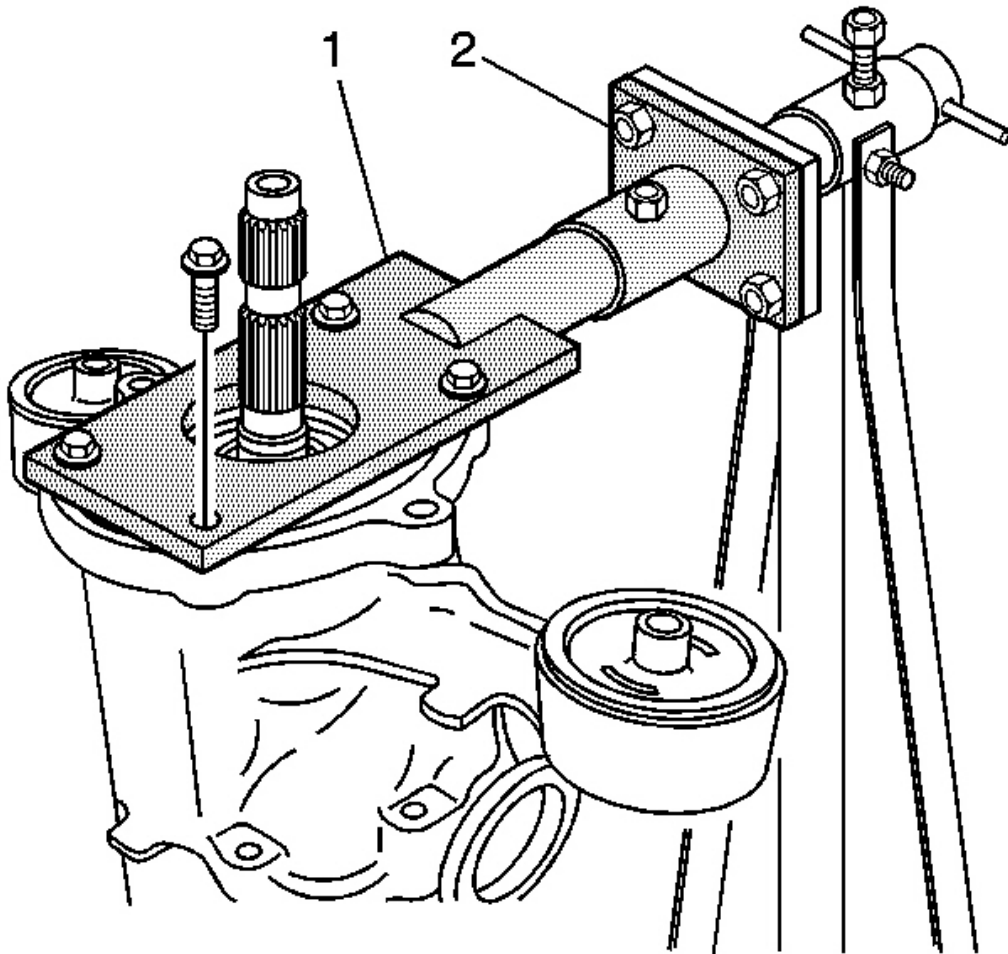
Installing Differential Housing On J44869 Using 4 Clutch Cover Bolts
